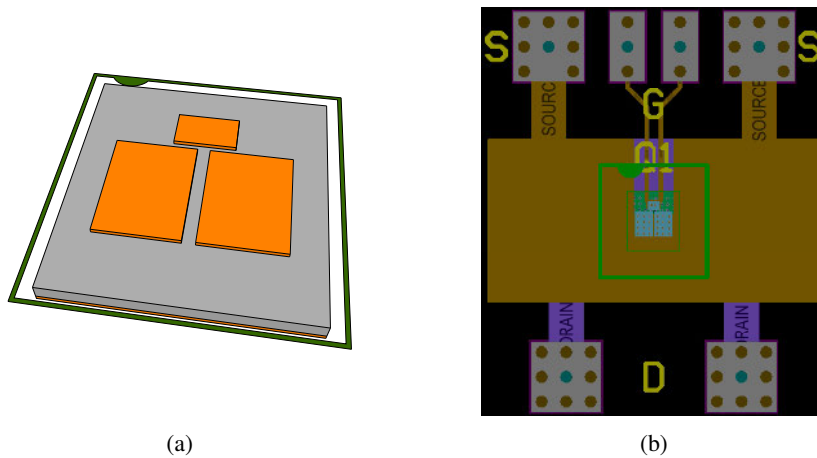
(a) 3D drawing of a die with keying. (b) Picture of a GERBER with apparent die keying on mechanical layer.
